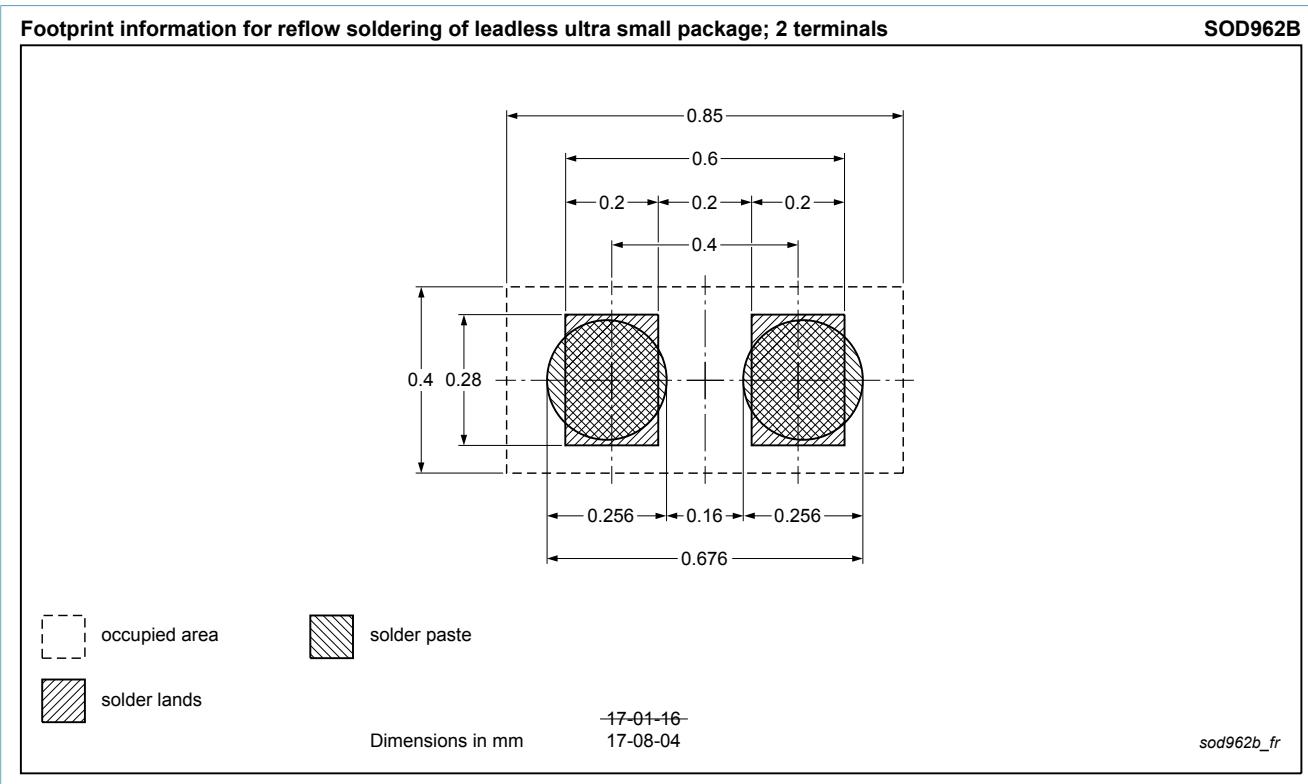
Reflow soldering footprint for DSN0603B-2 (SOD962B)
